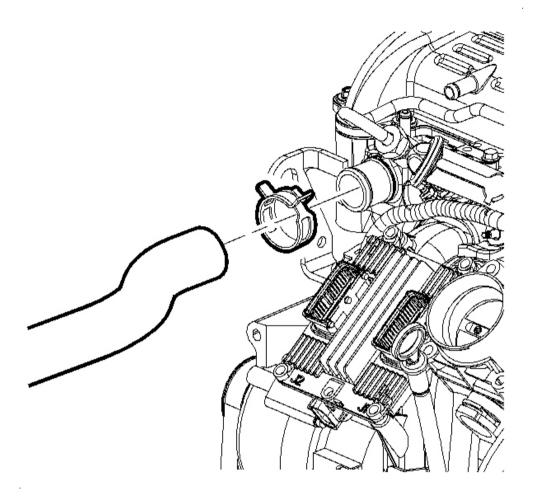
View Of Radiator Inlet Hose Clamp Courtesy of GENERAL MOTORS CORP.
